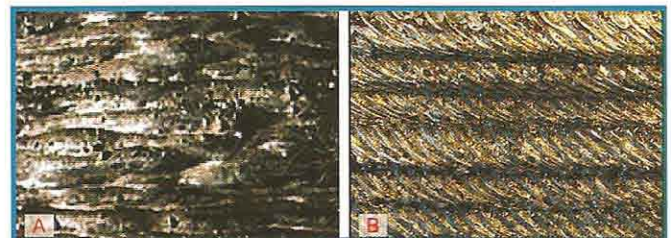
Conventional (A) and double-pulsed (B) MIG/MAG welding deposits.
